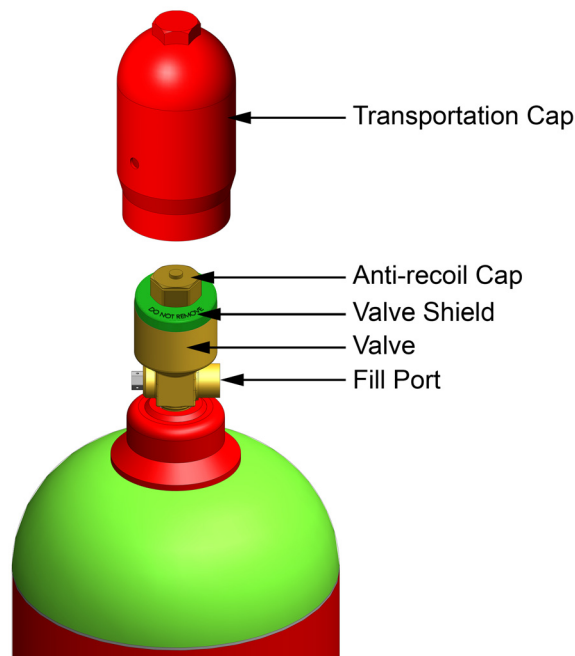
Natura IGS System Cylinder and Valve Assembly Component Locations
